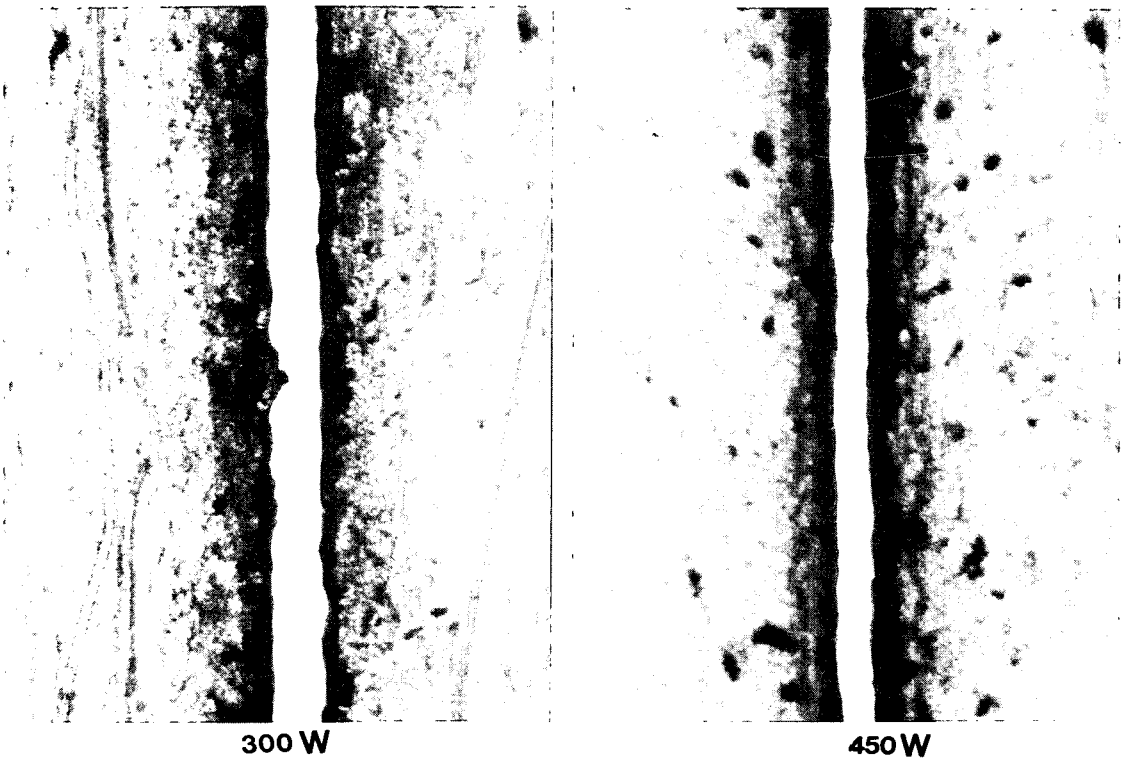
Typical example of laser machine with 300W and 450W for slit cutting width
